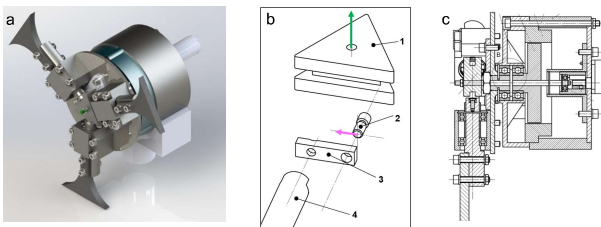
General view of the mechanism (a); detail of the Scotch Yoke mechanism for the pitch rotation (b); cross-sectional view of the mechanism (c).
